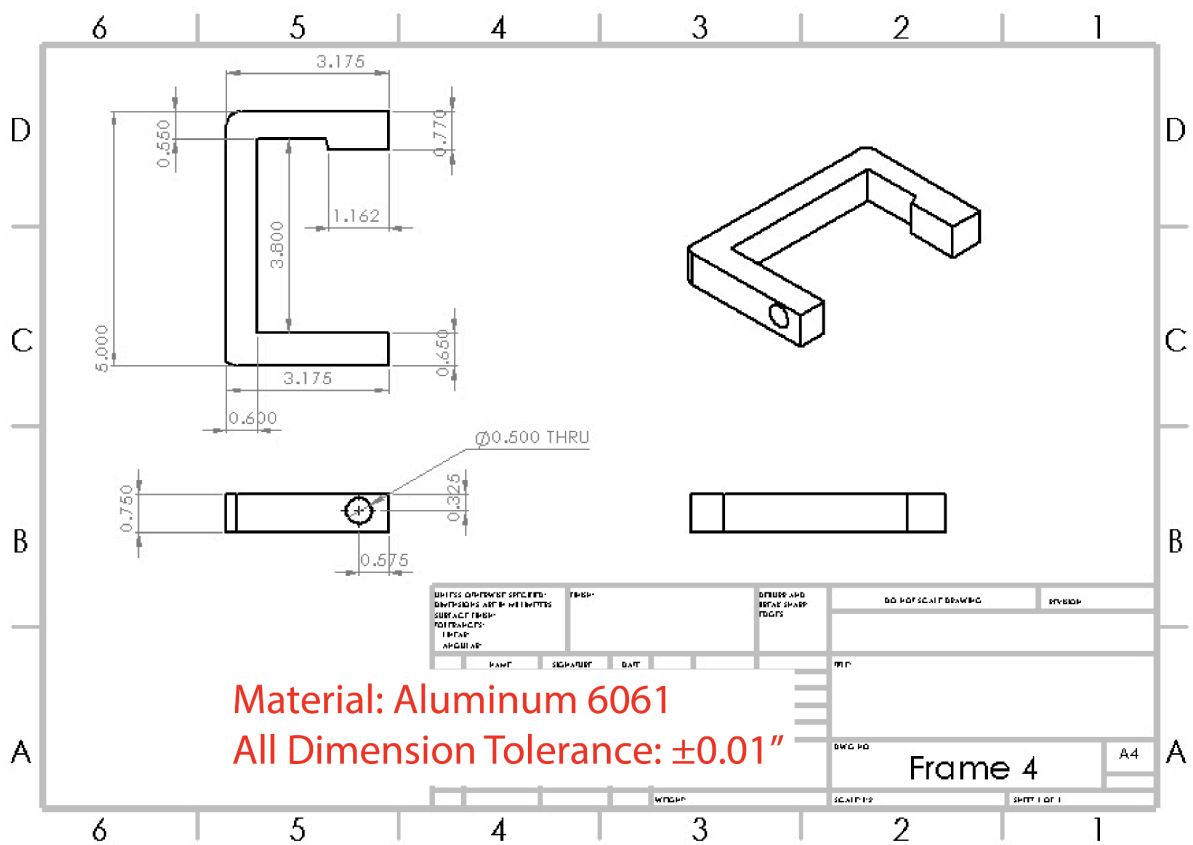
Final Orthographic Drawing for Frame with Accurate Dimensions
